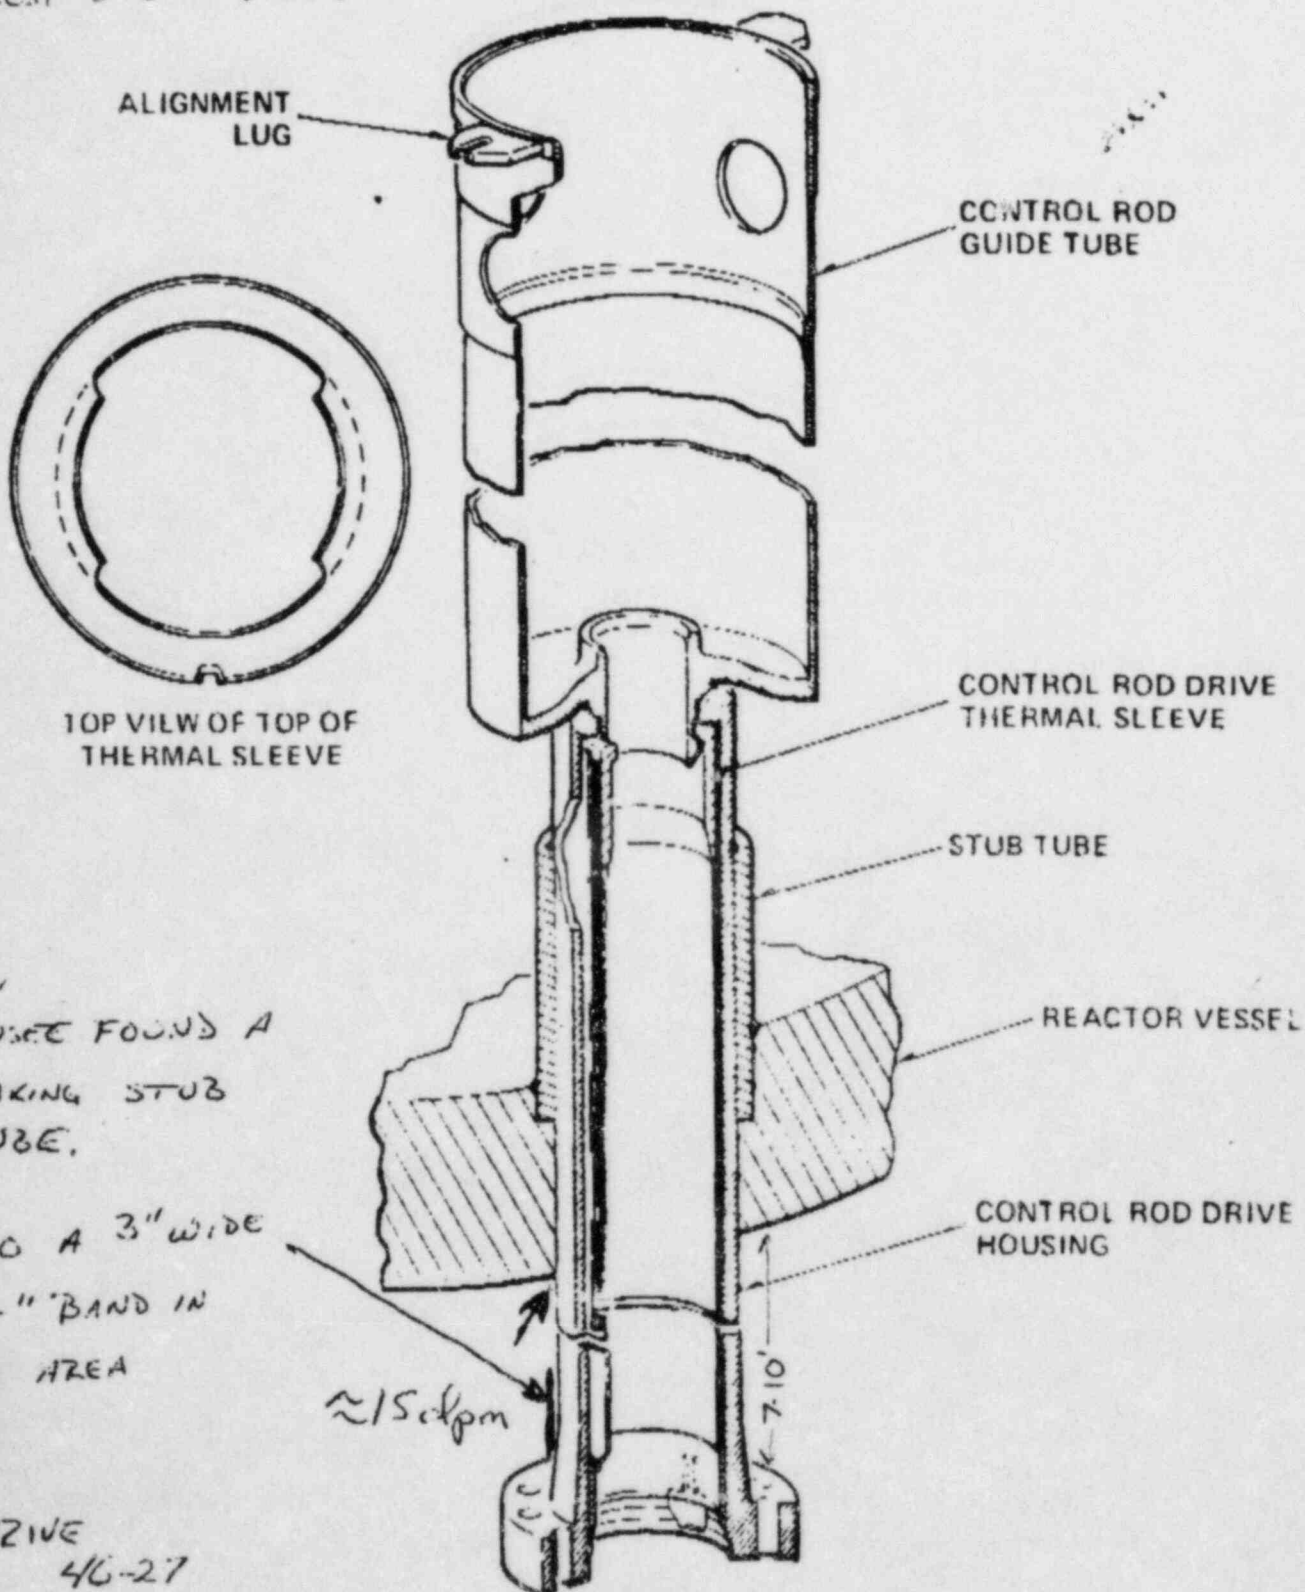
9 Control Rod Guide Tube to Control Rod Drive Housing Attachment
